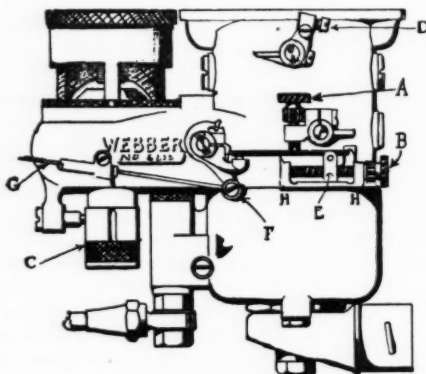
Side view of the Webber carburetor. There are adjustments for idling and for maximum power
